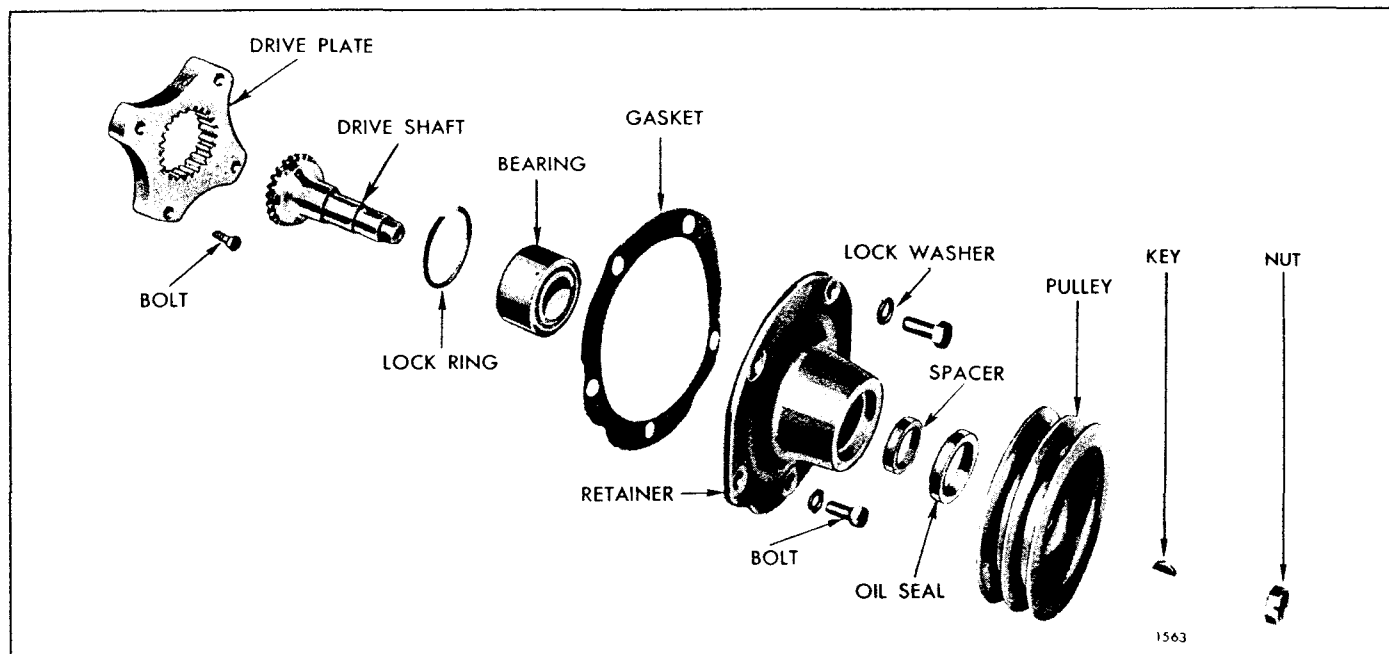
Components of Accessory Drive for Belt-Driven Accessory (Drive Plate Type)
